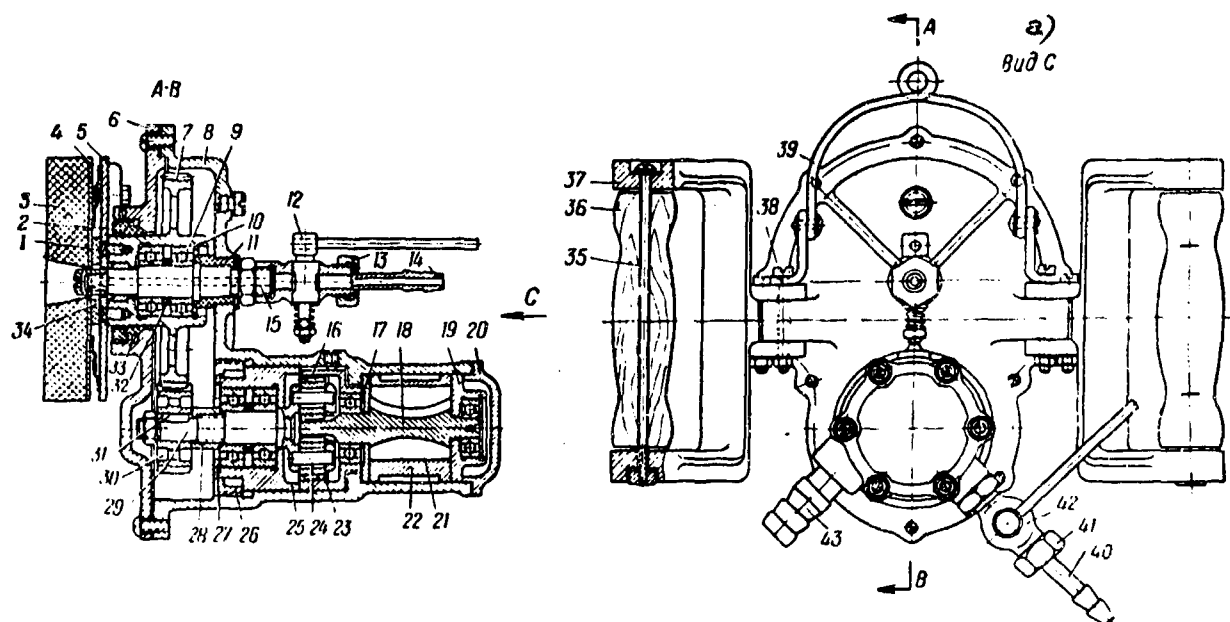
Pneumatic Rotor-Type Machine for Painting with the Centrifugal Method: 1 - intermediate ring; 2 - stuffing box nut; 3 - sponge-type rubber disk; 4 - removable working disk with slides; 5 - main disk ( of faceplate) with slides; 6 - frame cover; 7 - driven gear; 8 - frame; 9 - ball bearing; 10 - spring-type ring; 11 - frame bushing; 12 - inlet valve for paint; 13 - union nut; 14 - nipple; 15 - spindle; 16 - crown gear; 17 - lower cover of stator; 18 - rotor; 19 - upper cover of stator; 20 - frame cover; 21 - blade of small turbine; 22 - stator; 23 - intermediate gear; 24 - needle-type bearing; 25 - end-type bushing; 26 - threaded ring; 27 - support key; 28 - nut to central shaft; 29 - central shaft; 30 - driving gear 31 - prismatic key; 32 - intermediate ring; 33 - stuffing box; 34 - bushing; 35 - screw; 36, 37 - frame levers; 38 - support loop; 39 - suspension; 40 - nipple for air hose; 41 - union nut; 42 - plug-type valve for feeding air; and 43 - nipple for diversion of processed (spent) air. Key: a) view C.
